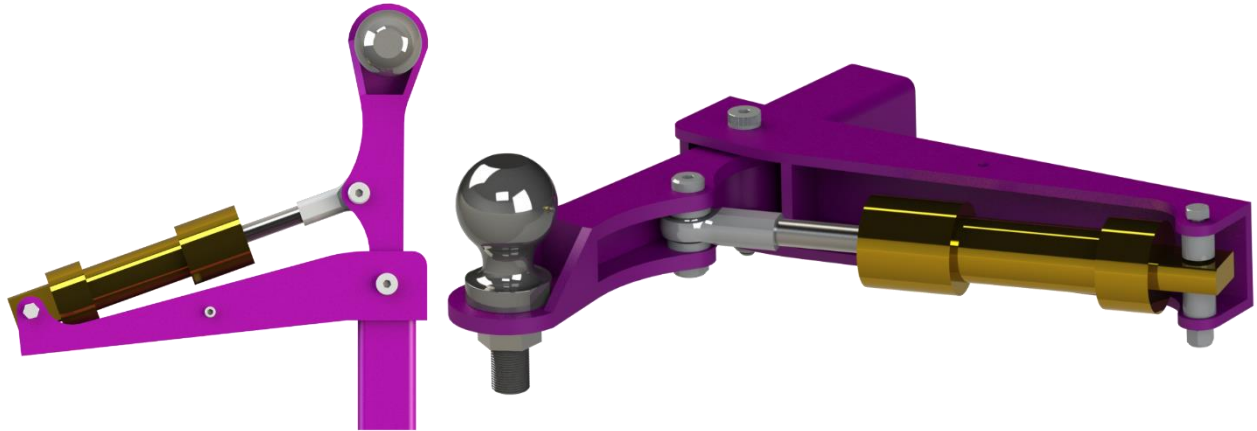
Mechanism structural components: top planar view (left), isometric view (right)
